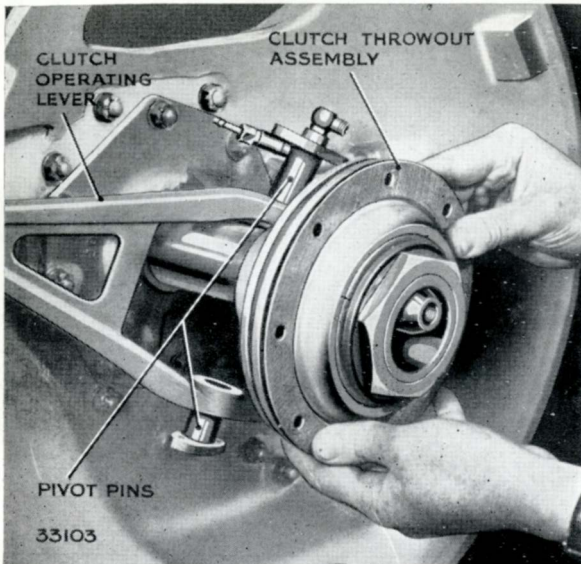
REMOVING THE WITHDRAWAL ASSEMBLY
